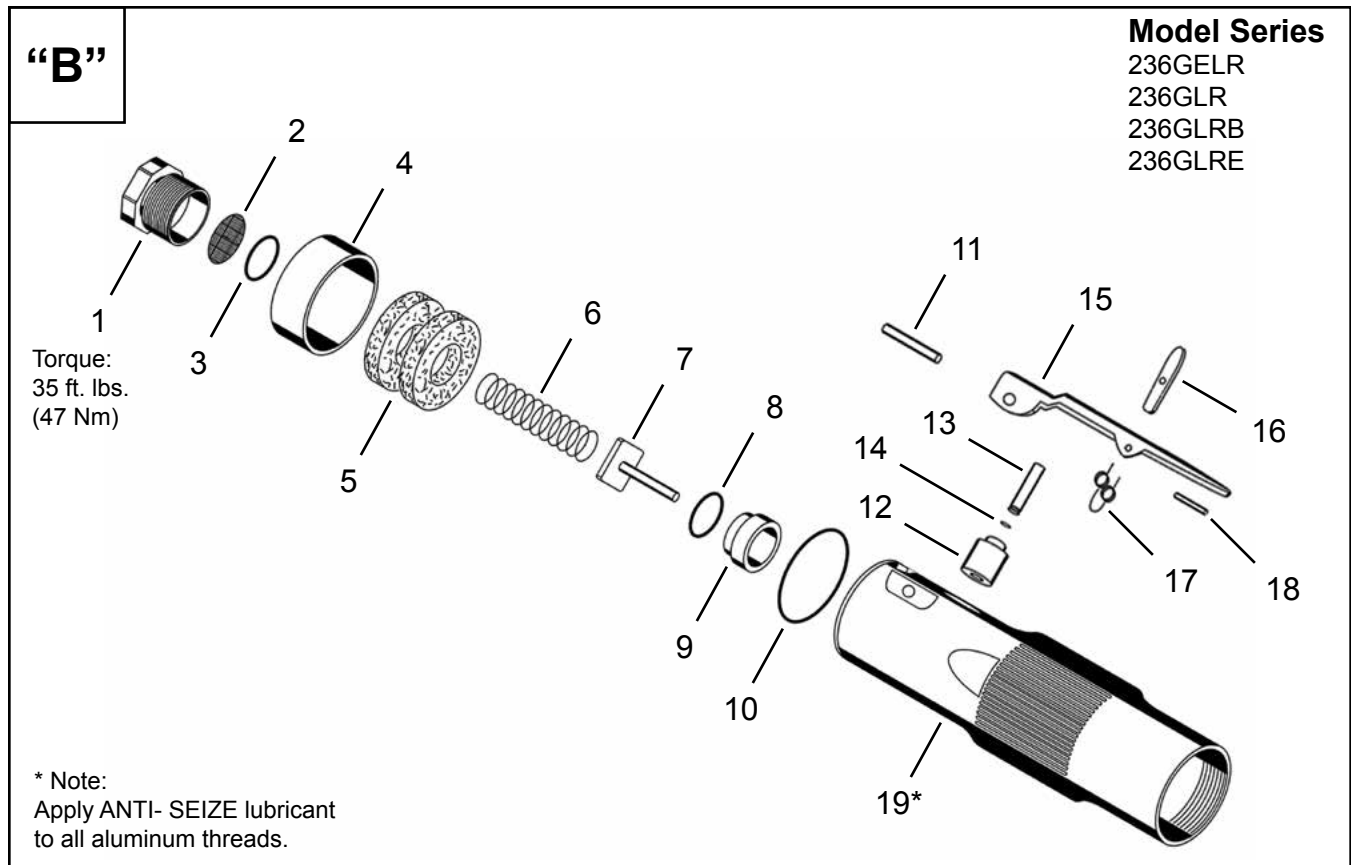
G and 236G Series Front and Side Exhaust Handle Assembly
